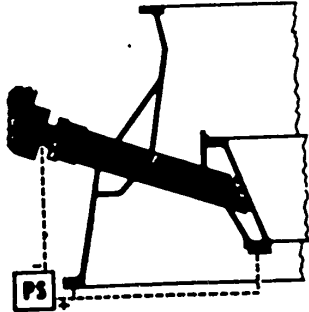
Schematic Diagram of the Fourth Stage of the Production Equipment of the Cincinnati Milling Machine Co., Shown in Fig.30. The elliptical holes are drilled out with a tube-shaped electrode. In the three preceding stages the holes are drilled in the three outer covers.
